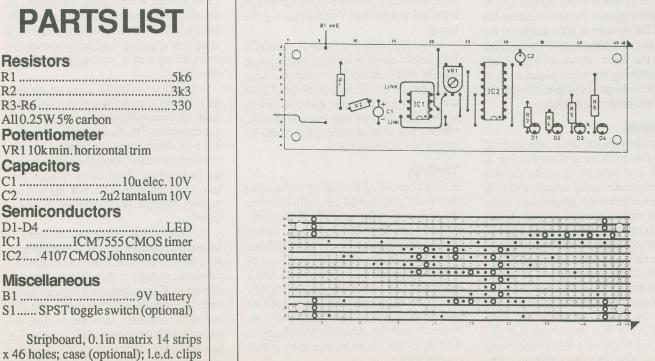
Stripboard component layout and details of breaks required in the underside copper strips. The ICs should be in sockets.
